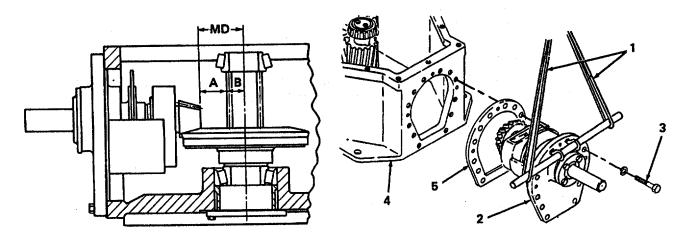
Calculating Thickness of High Speed Head Assembly Shim Pack.
